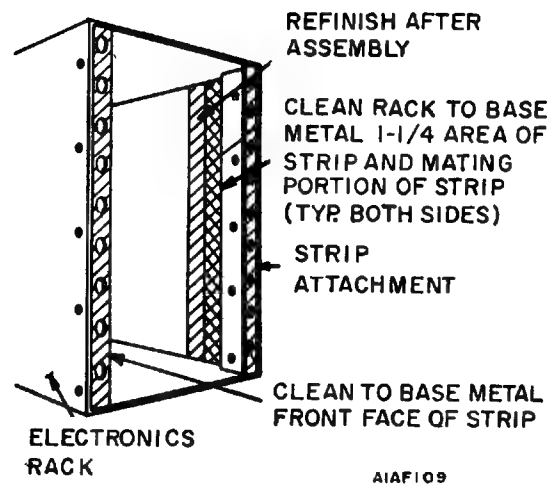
29. Typical Method of Bonding Between Attaching Flange of Electronic Package and Rack
